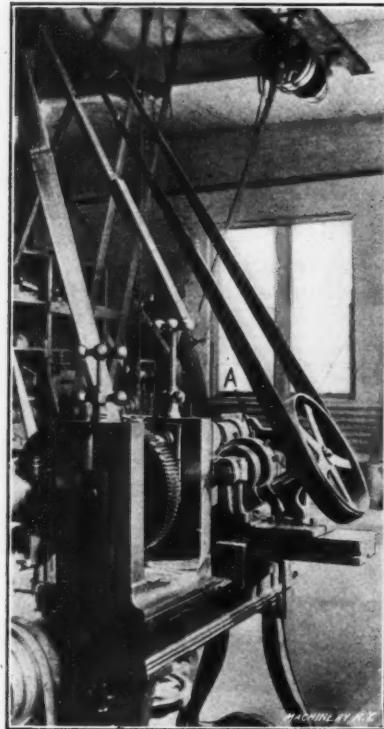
Lincoln Miller equipped with Special Device for Milling the Blades
